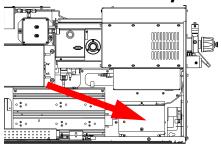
DC Driver Assembly with Cover Removed (Left Side)
